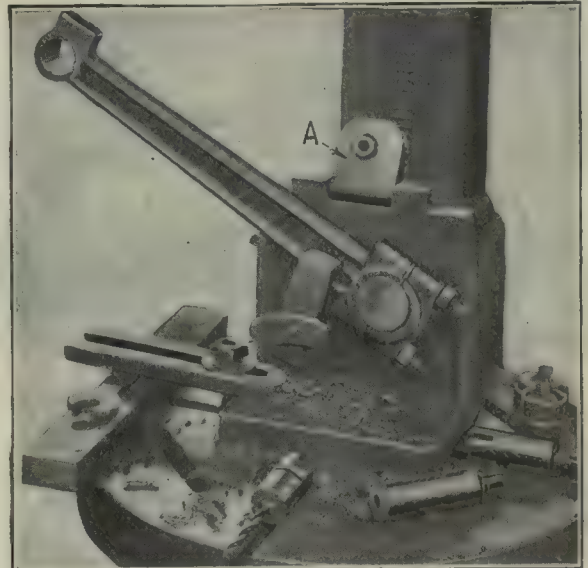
JIG FOR DRILLING GREASE-CUP HOLE
